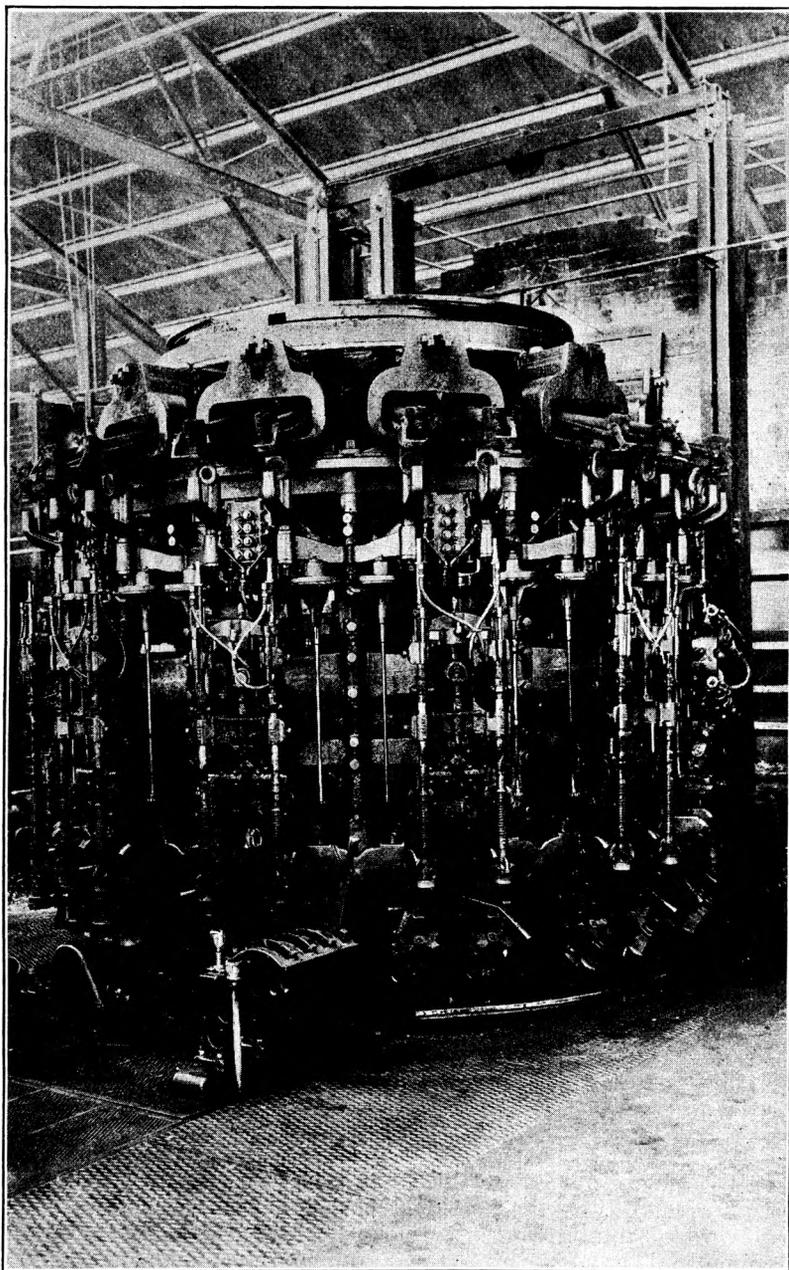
WESTLAKE AUTOMATIC MACHINE (OLD TYPE)
